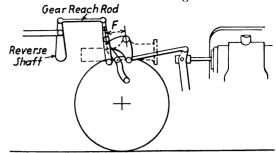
Position of reverse yoke when gear reach rod is adjusted properly
